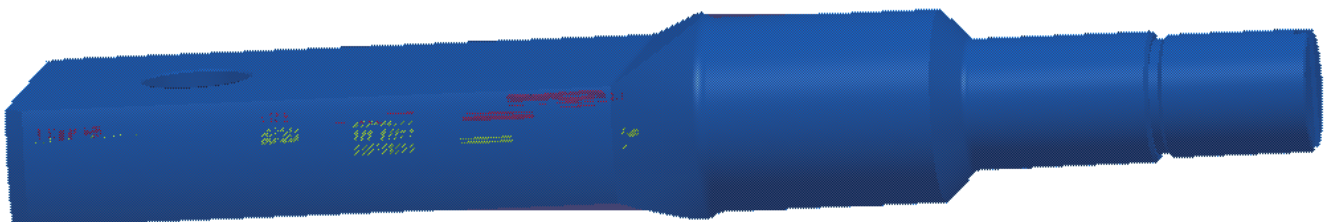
Results of ultrasonic testing performed on the threaded spindle of the beam (side view)
